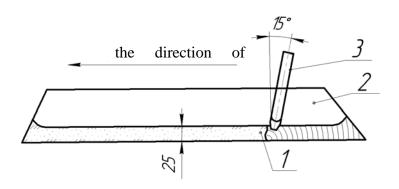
The scheme of electric-arc welding of share blade with dust-like hard alloy: 1 – charge mixture; 2 – share; 3 – graphite electrode
